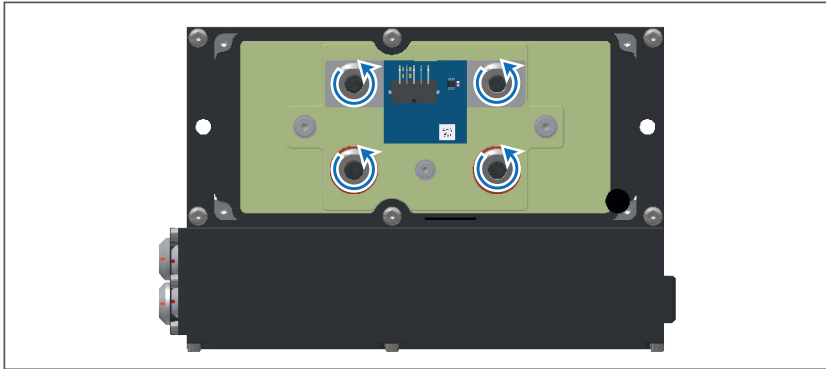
HV BM 1.2, lid removed, loosen and remove the M8 nuts
